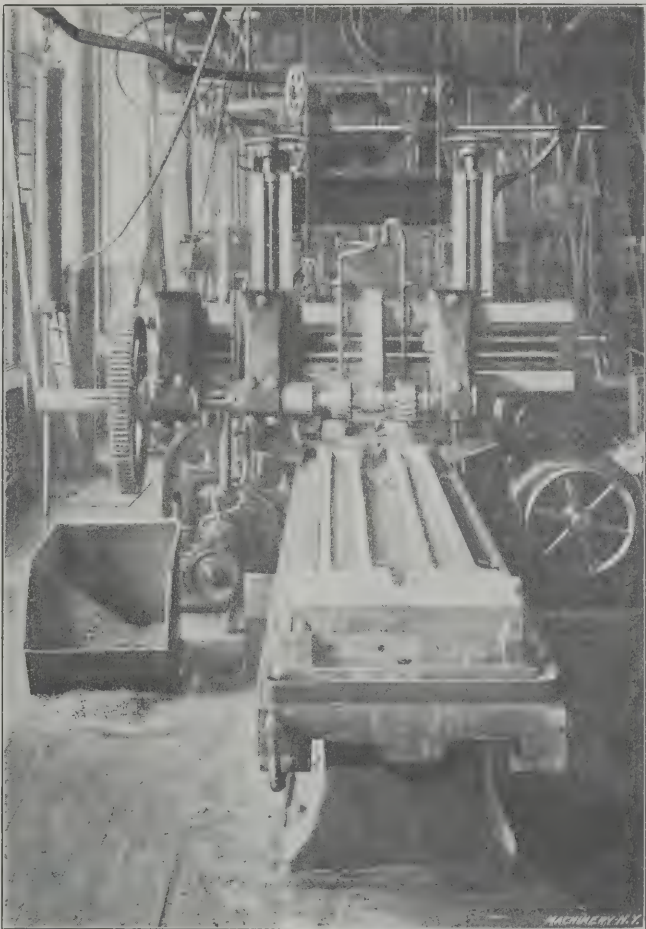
Channeling Operation performed with Inserted Tooth Cutter
